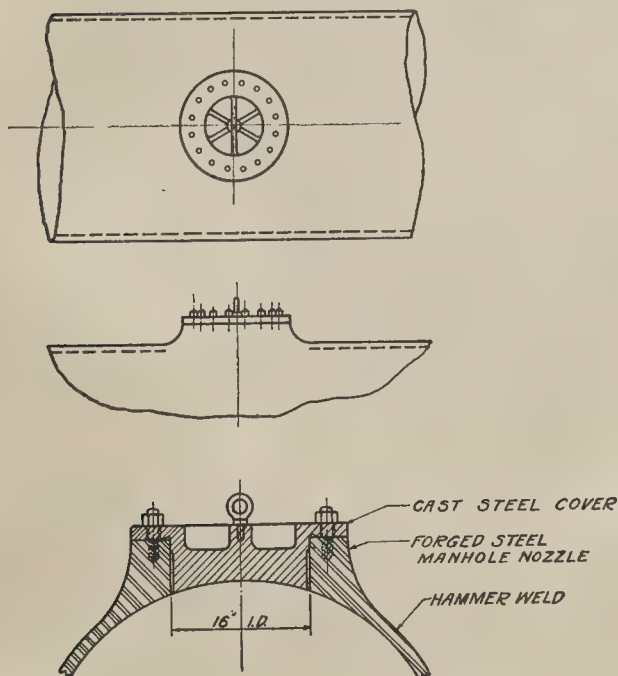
WELDED FORGED STEEL MANHOLE—M. W. KELLOGG COMPANY.
